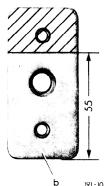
Threaded plate modification The cross-hatched area is to be removed (dimensions in mm)
